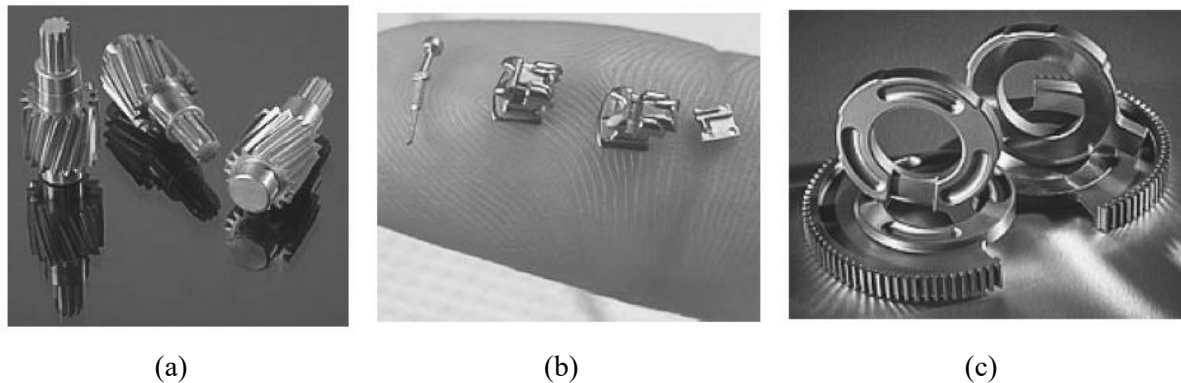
Pieces displaying complex forms manufactured by PM. Helical gear and spur pinion (a). Orthodontic system bracket, slide and hook (b). Sector gear and fixed rings (c) [6].
